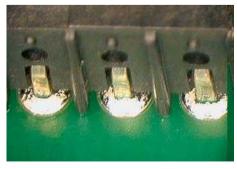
Soldering spot on the primary side: perimeter wetting and soldering pad wetting in accordance with standard
